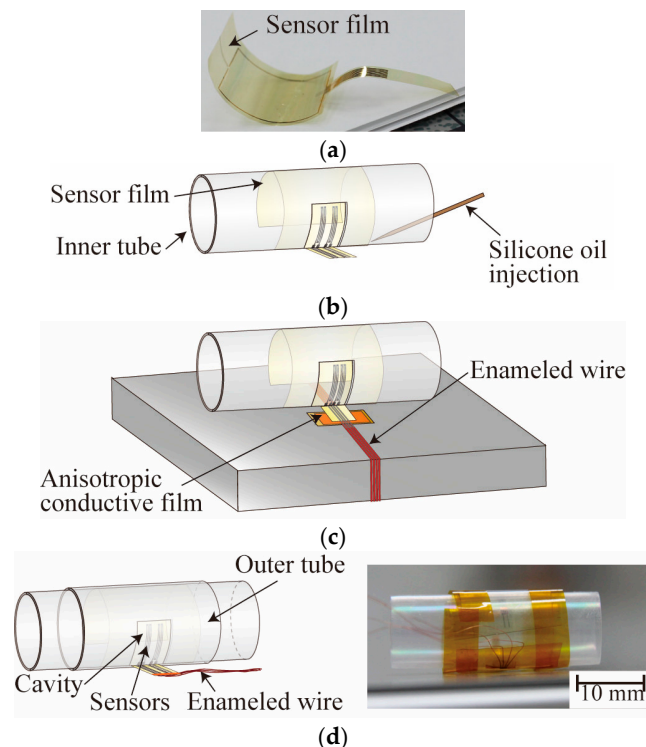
Assembly of sensor film into tube: (a) Plastically bent sensor film; (b) Applying silicone oil into gap between film and tube; (c) Wiring connection and parylene C deposition; (d) Inserting sensor into outside tube.
